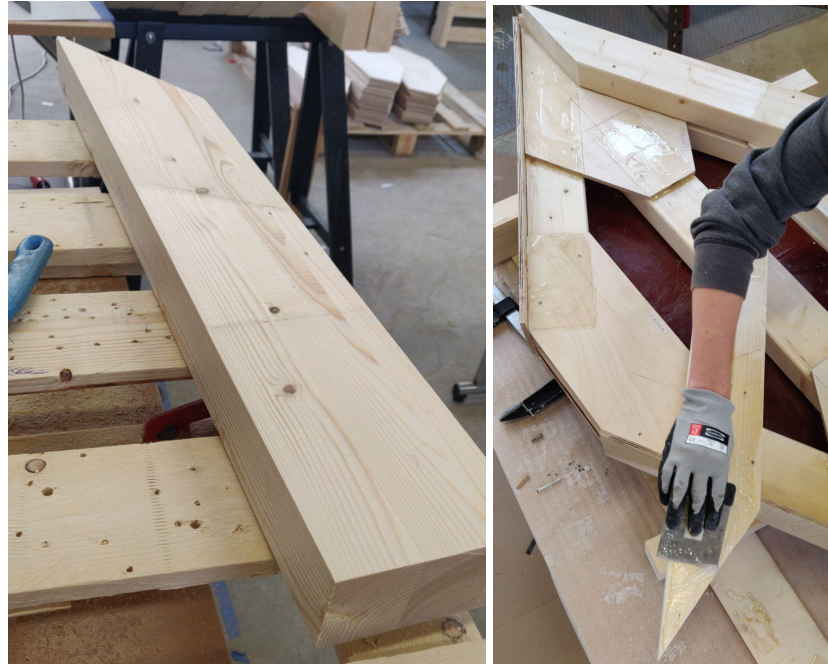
Sanded surfaces (to the left), glueing of adjacent surfaces (to the right)
